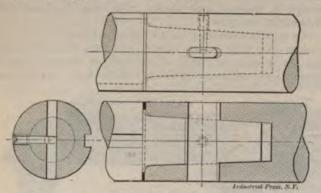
Front End of Boring Bar showing Method of Attaching Boring Head.
